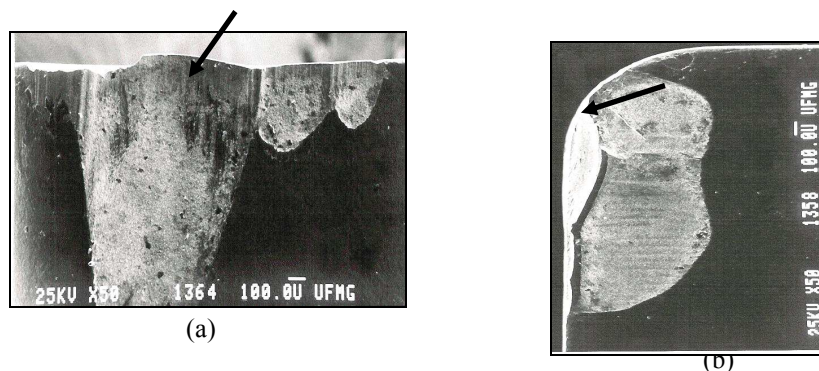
Tool wear after turning gray cast iron with $Al_{1-x}Cr_xN$ / WC-Co (6%) coated tools at $v_c = 200$ m/min, $f = 0.20$ mm/rev and $a_p = 2.0$ mm; (a) clearance face and (b) rake face
